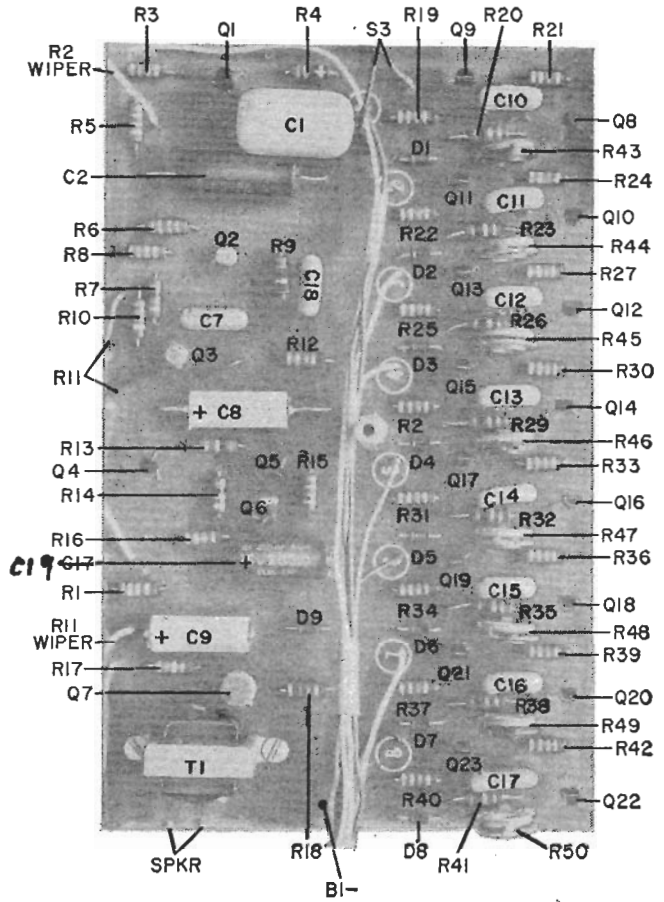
Actual size printed circuit etching guide is shown on opposite page; component placement on board is shown at right. Refer to packages or cases for transistor lead identification.
